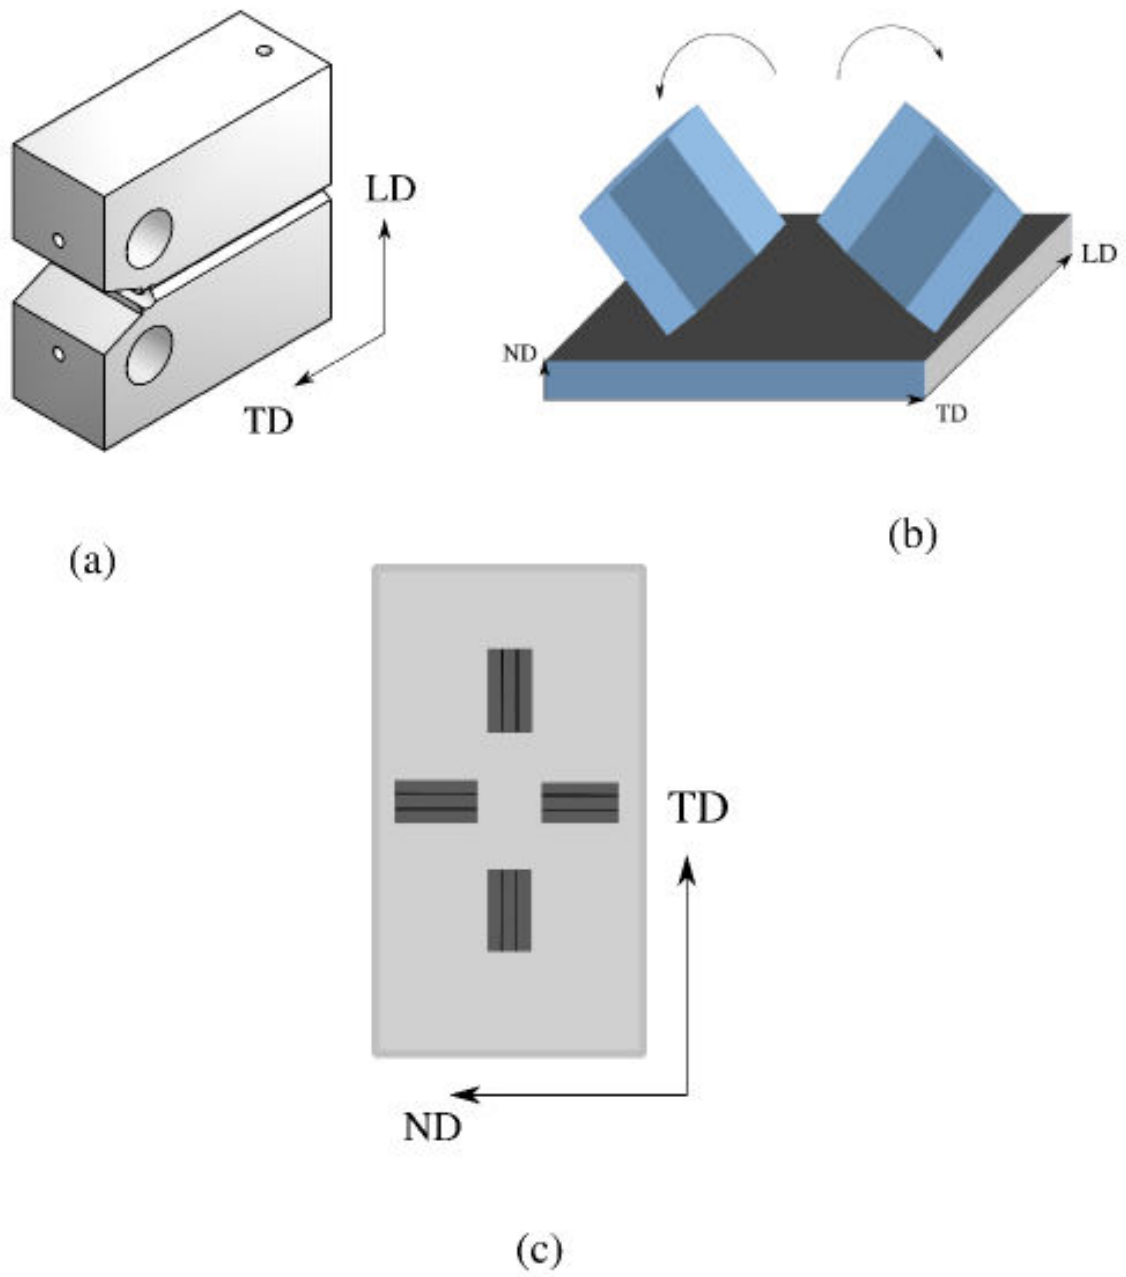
Schematic illustration of the examined fracture surface.
